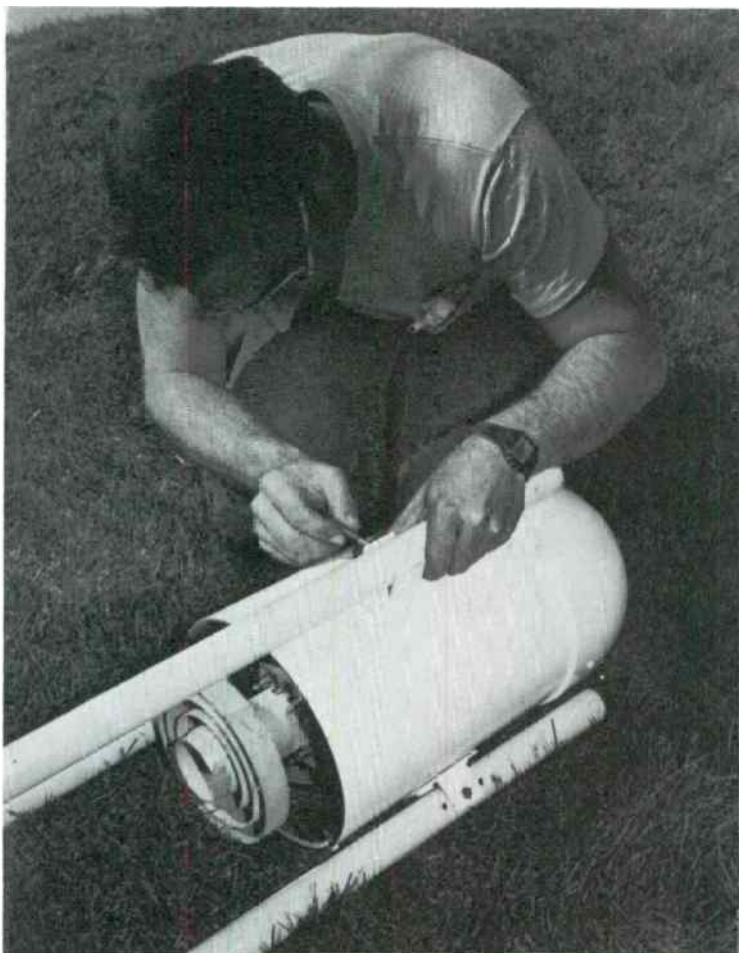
Fiber-glass legs are secured to LNA housing assembly.
